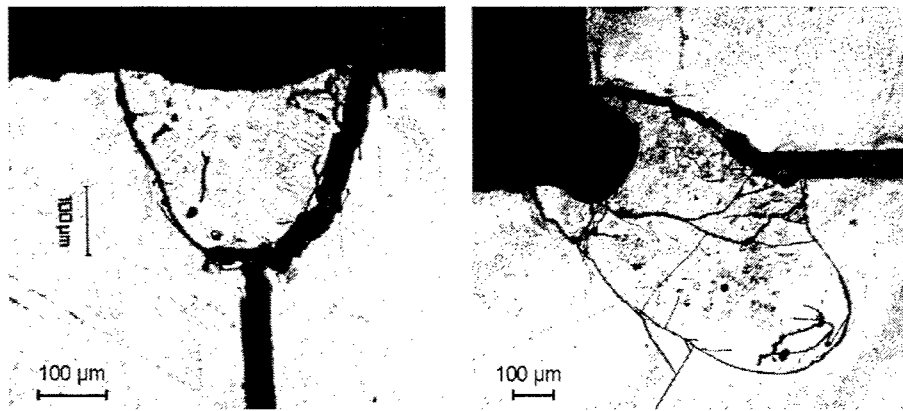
Laser welding of silicon leads to thermally induced cracks
